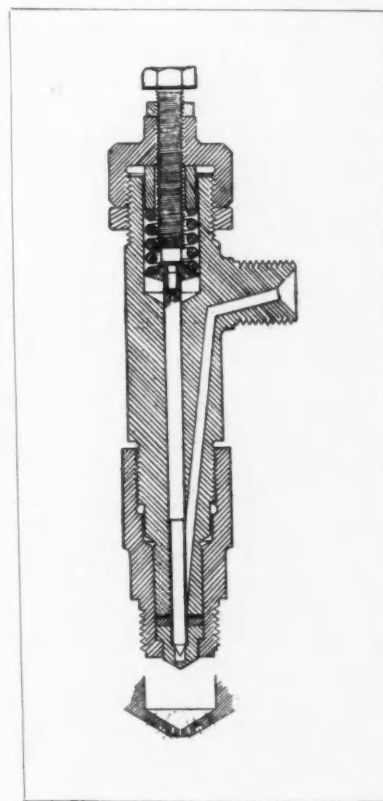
Spring Loaded Automatic Injection-Valve. Enlarged Section of Nozzle Shown Below.
